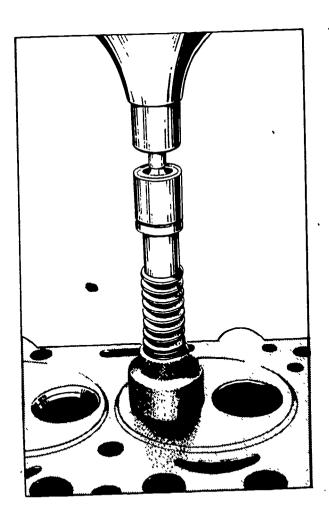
Grinding valve seats using a concentric type of grinder.
